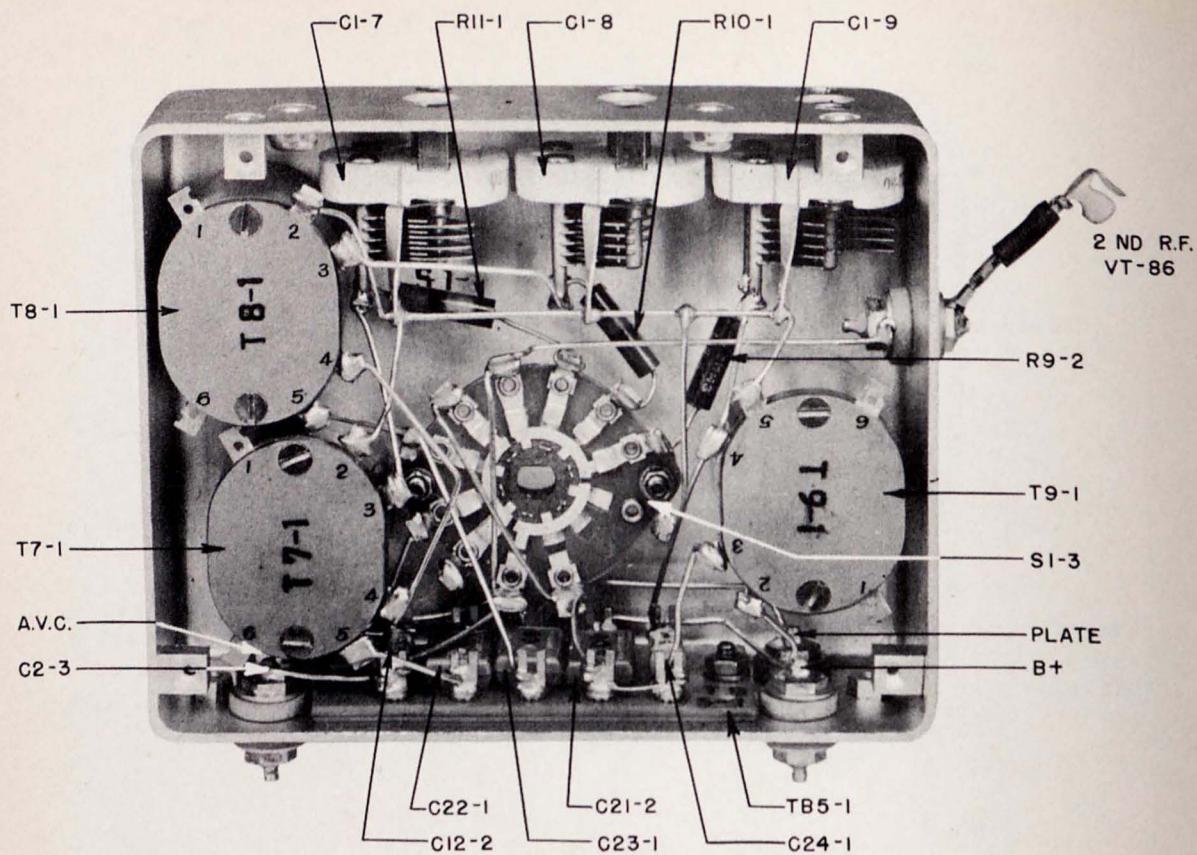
1ST R.F. TUNING ASSEMBLY (105)
